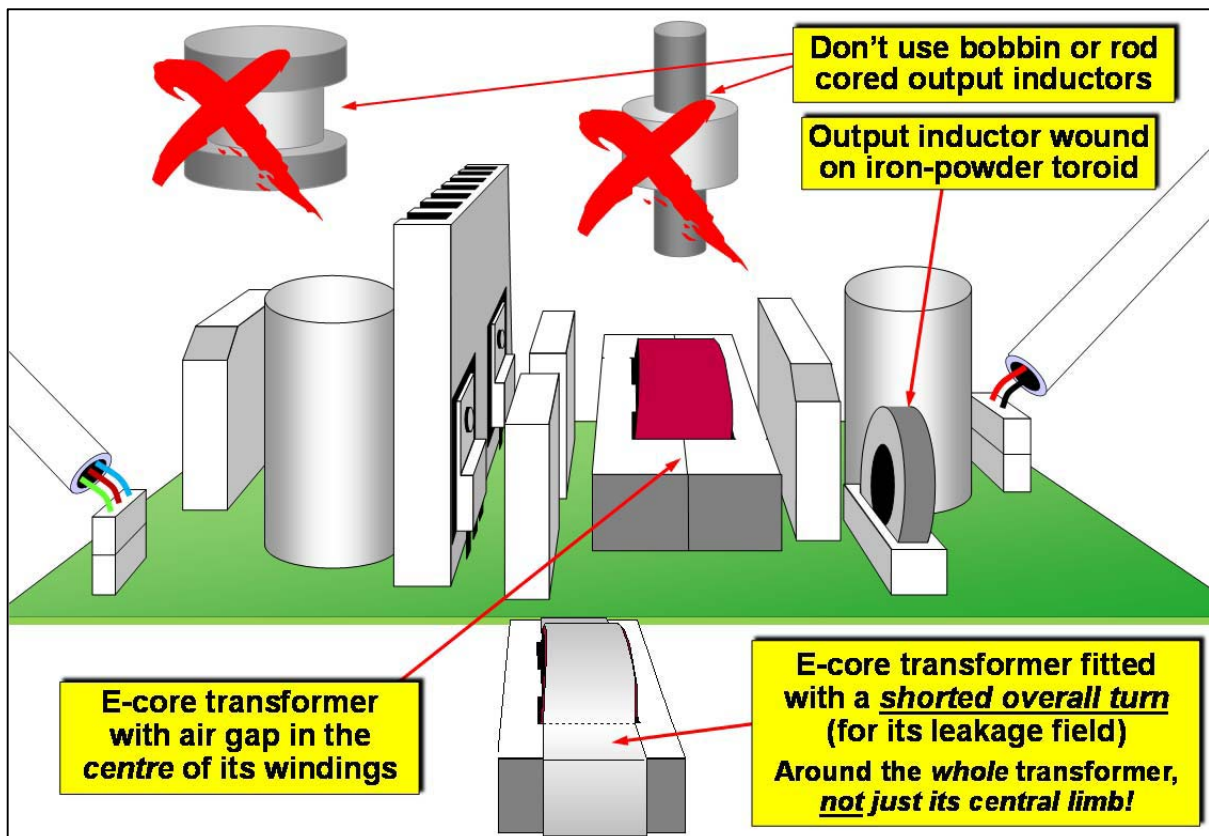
Example PCB assembly using E-core transformer with central air-gap, plus an added output inductor
